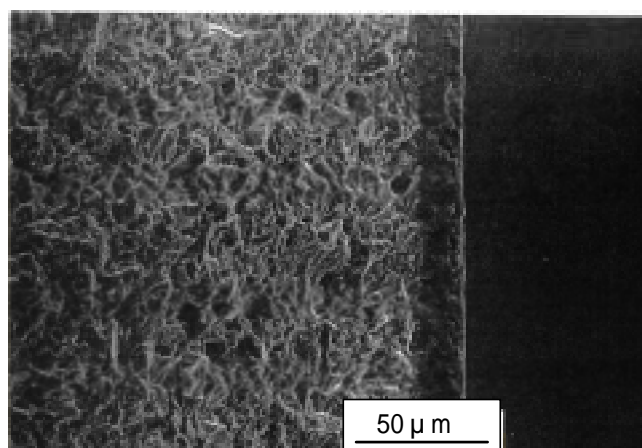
Fracture surface (Soft nitriding)
